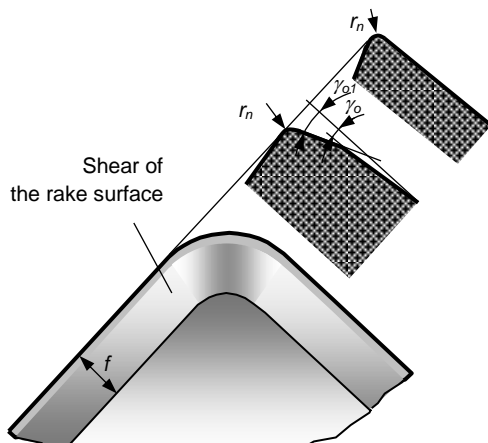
Examples of protection of BN blades from cutting off the cutting edges
